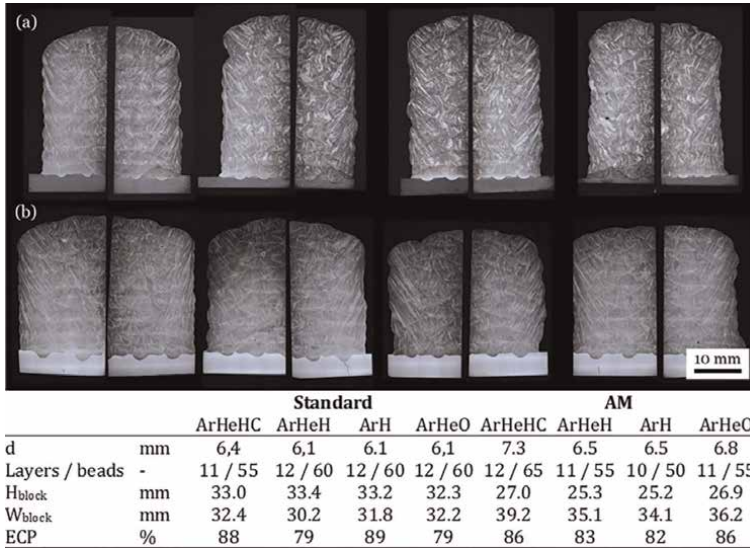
Cross sections (Y-Z plane) of the block structures of S Ni 7718 batches: (a) standard (b) AM.
